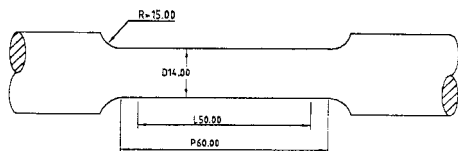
Specimen used for tensile tests. All dimensions are in mm.
